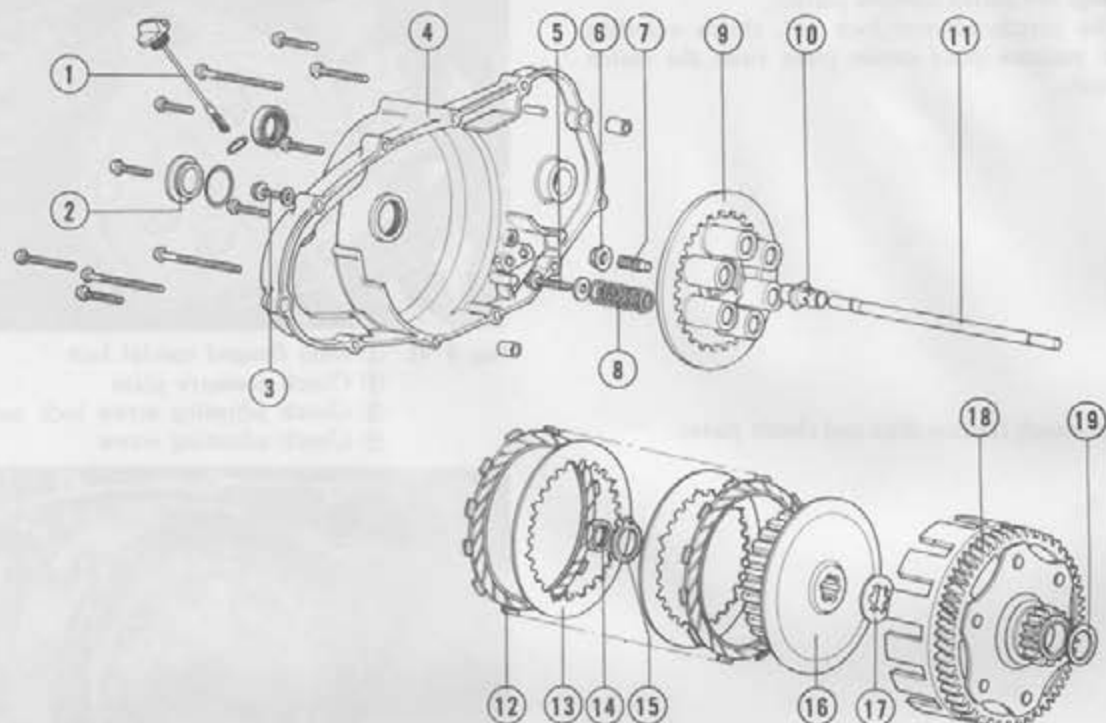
① Transmission oil level gauge ⑥ 6mm flanged nut ⑪ Clutch lifter rod ⑫ Clutch center
